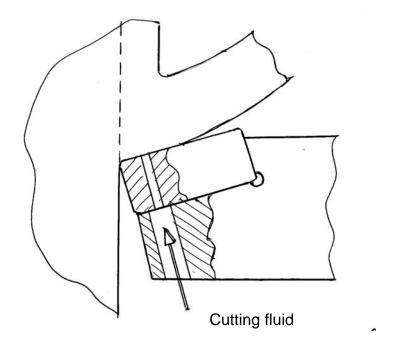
Application of cutting fluid at high pressure through the hole in the tool.
